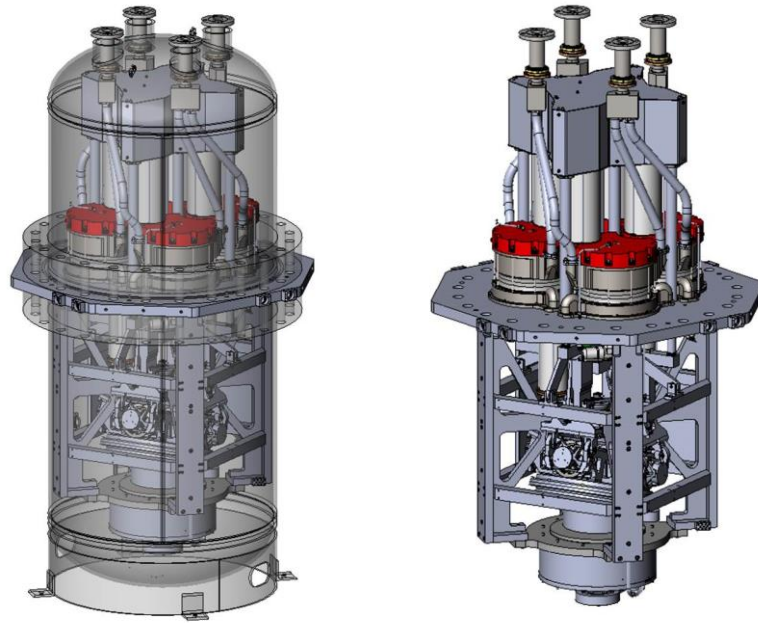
ThermoHeart Engine in pressure vessel (left); internal assembly (right).
